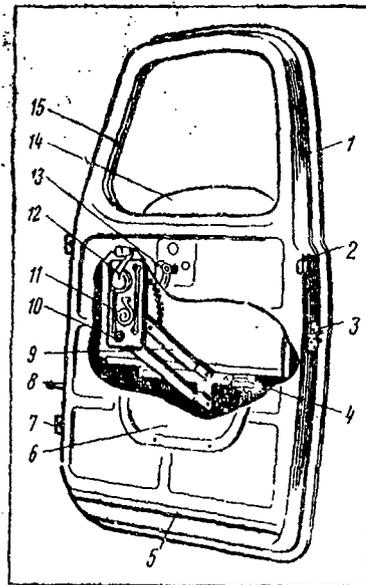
Cabin Door of ZIL-157K: 1, 5 and 6, seals; 2, latch bar; 3, stop wedge; 4, connector; 6, hatch cover; 7, door hinges; 8, door limiter (stop); 9, lifting levers; 10, adjusting screw; 11, glass lifter; 12, window crank; 13, door handle; 14, window glass
